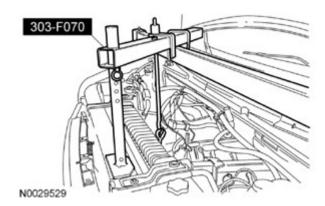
Installing Engine Support Bar Courtesy of FORD MOTOR CO.
